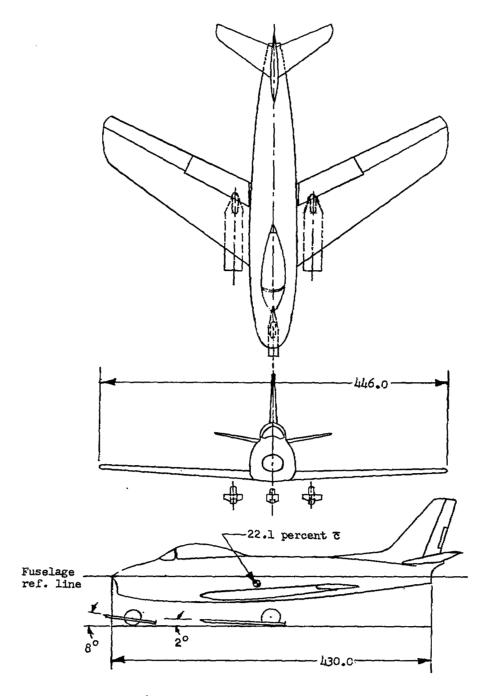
Three-view drawing of airplane with hydro-skis installed.
